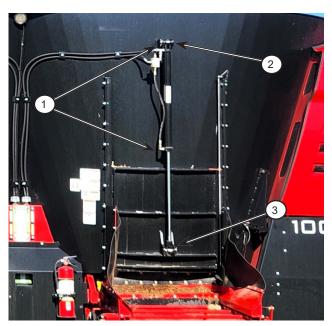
Remove the existing hydraulic cylinder (Rear unload door shown)
